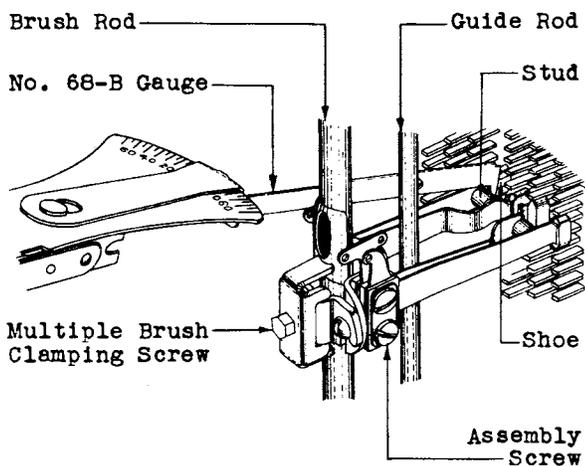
Method of Checking Brush Spring Tension Using No. 68-B Gauge
